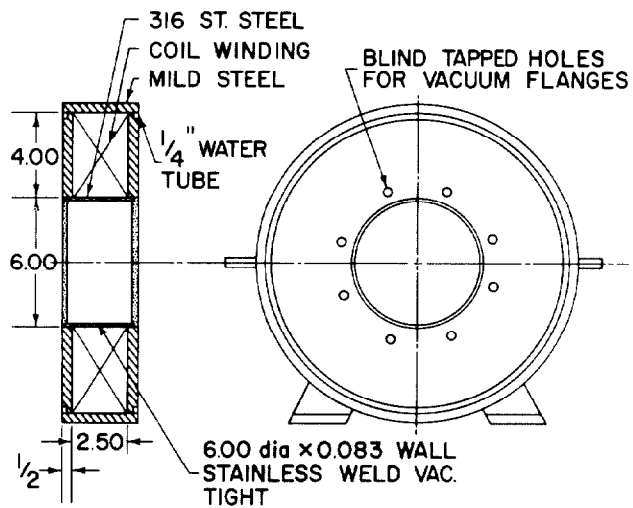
Sketch of 6-inch i.d. iron-shrouded focusing coil assembly.
